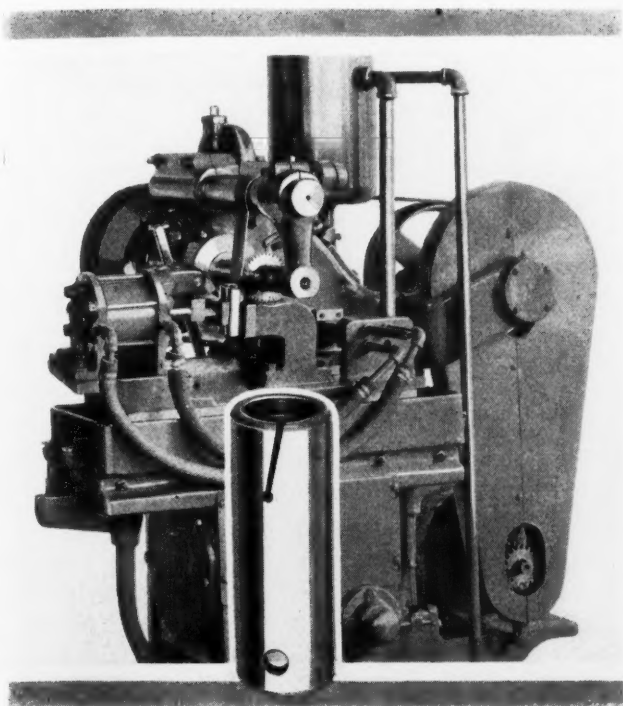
Piston-pin Slotting Job Performed on a Kent-Owens Semi-automatic Milling Machine at the Rate of 700 Pieces an Hour
